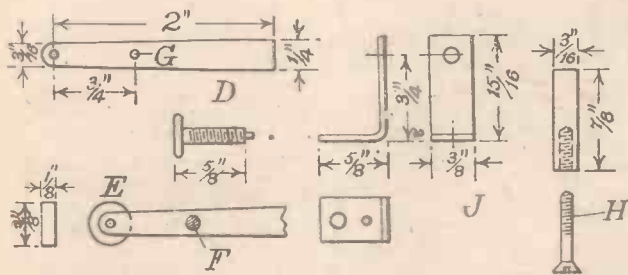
Armature spring, supporting pillar, contact screw and bracket.
